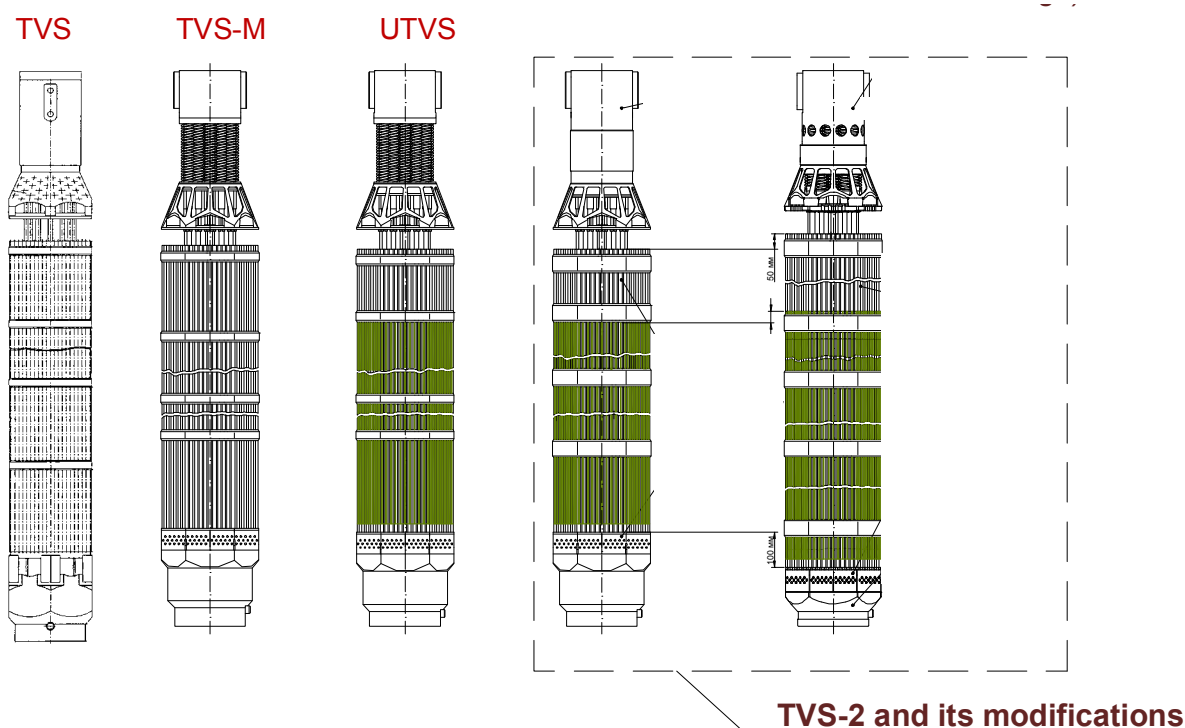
Fuel assembly for WWER-1000 (EDO "GIDROPRESS" design)
